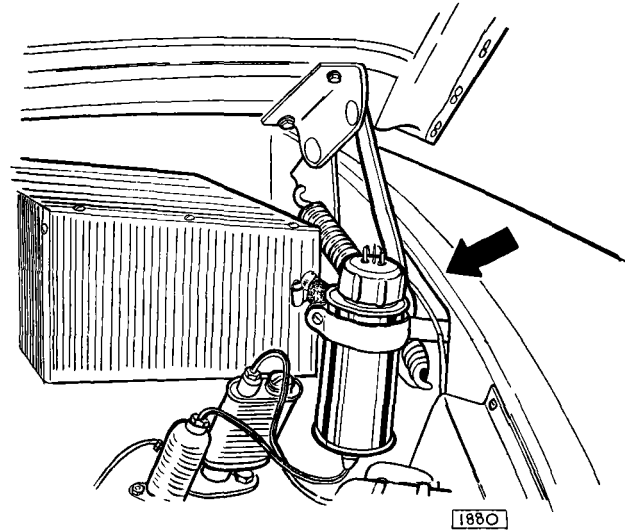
Location of the hydraulic brake fluid reservoir on left-hand drive cars.
